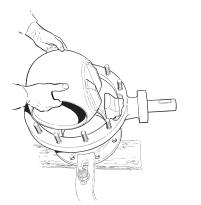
Lifting the ball with the valve in closed position - here with the valve on a work bench, but it can be done with mounted actuator.
